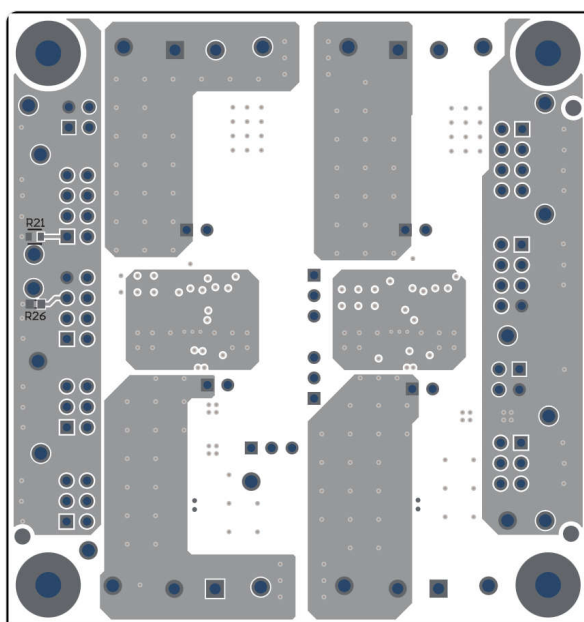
LM7320-30EVM Board: Bottom Assembly
